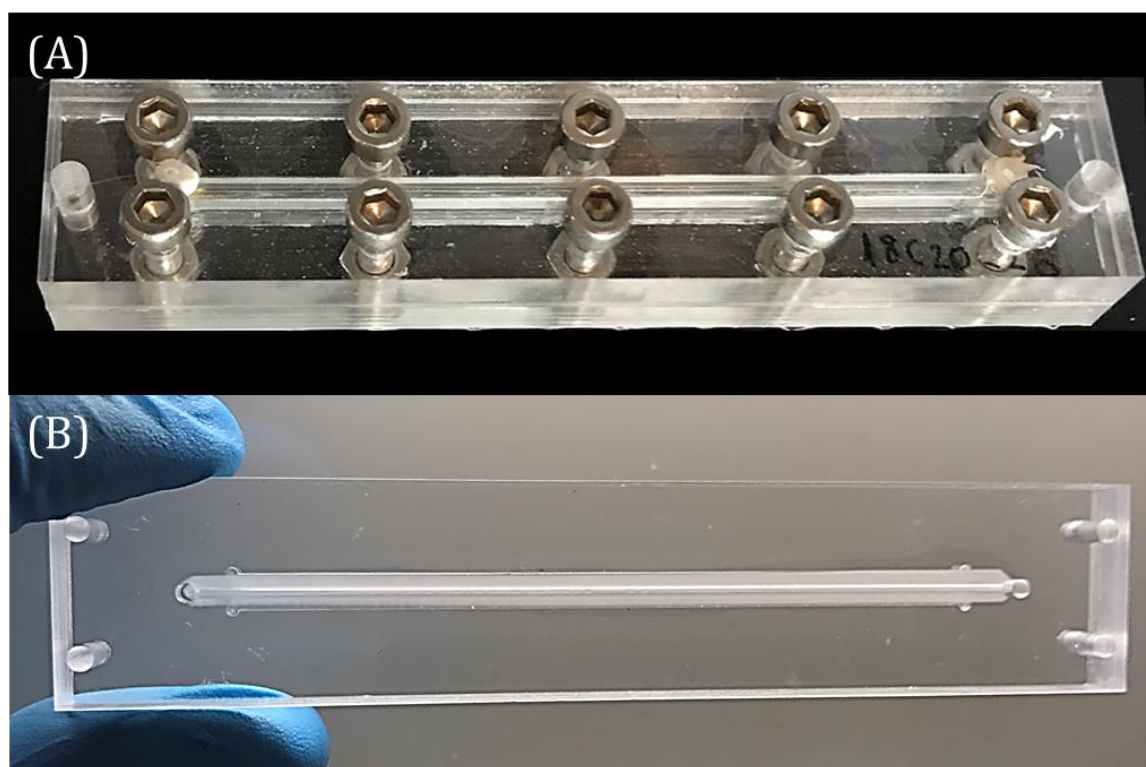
SLM based IRCs (A) with screws used for assembly and (B) with UV assisted thermal bonding used for assembly.
